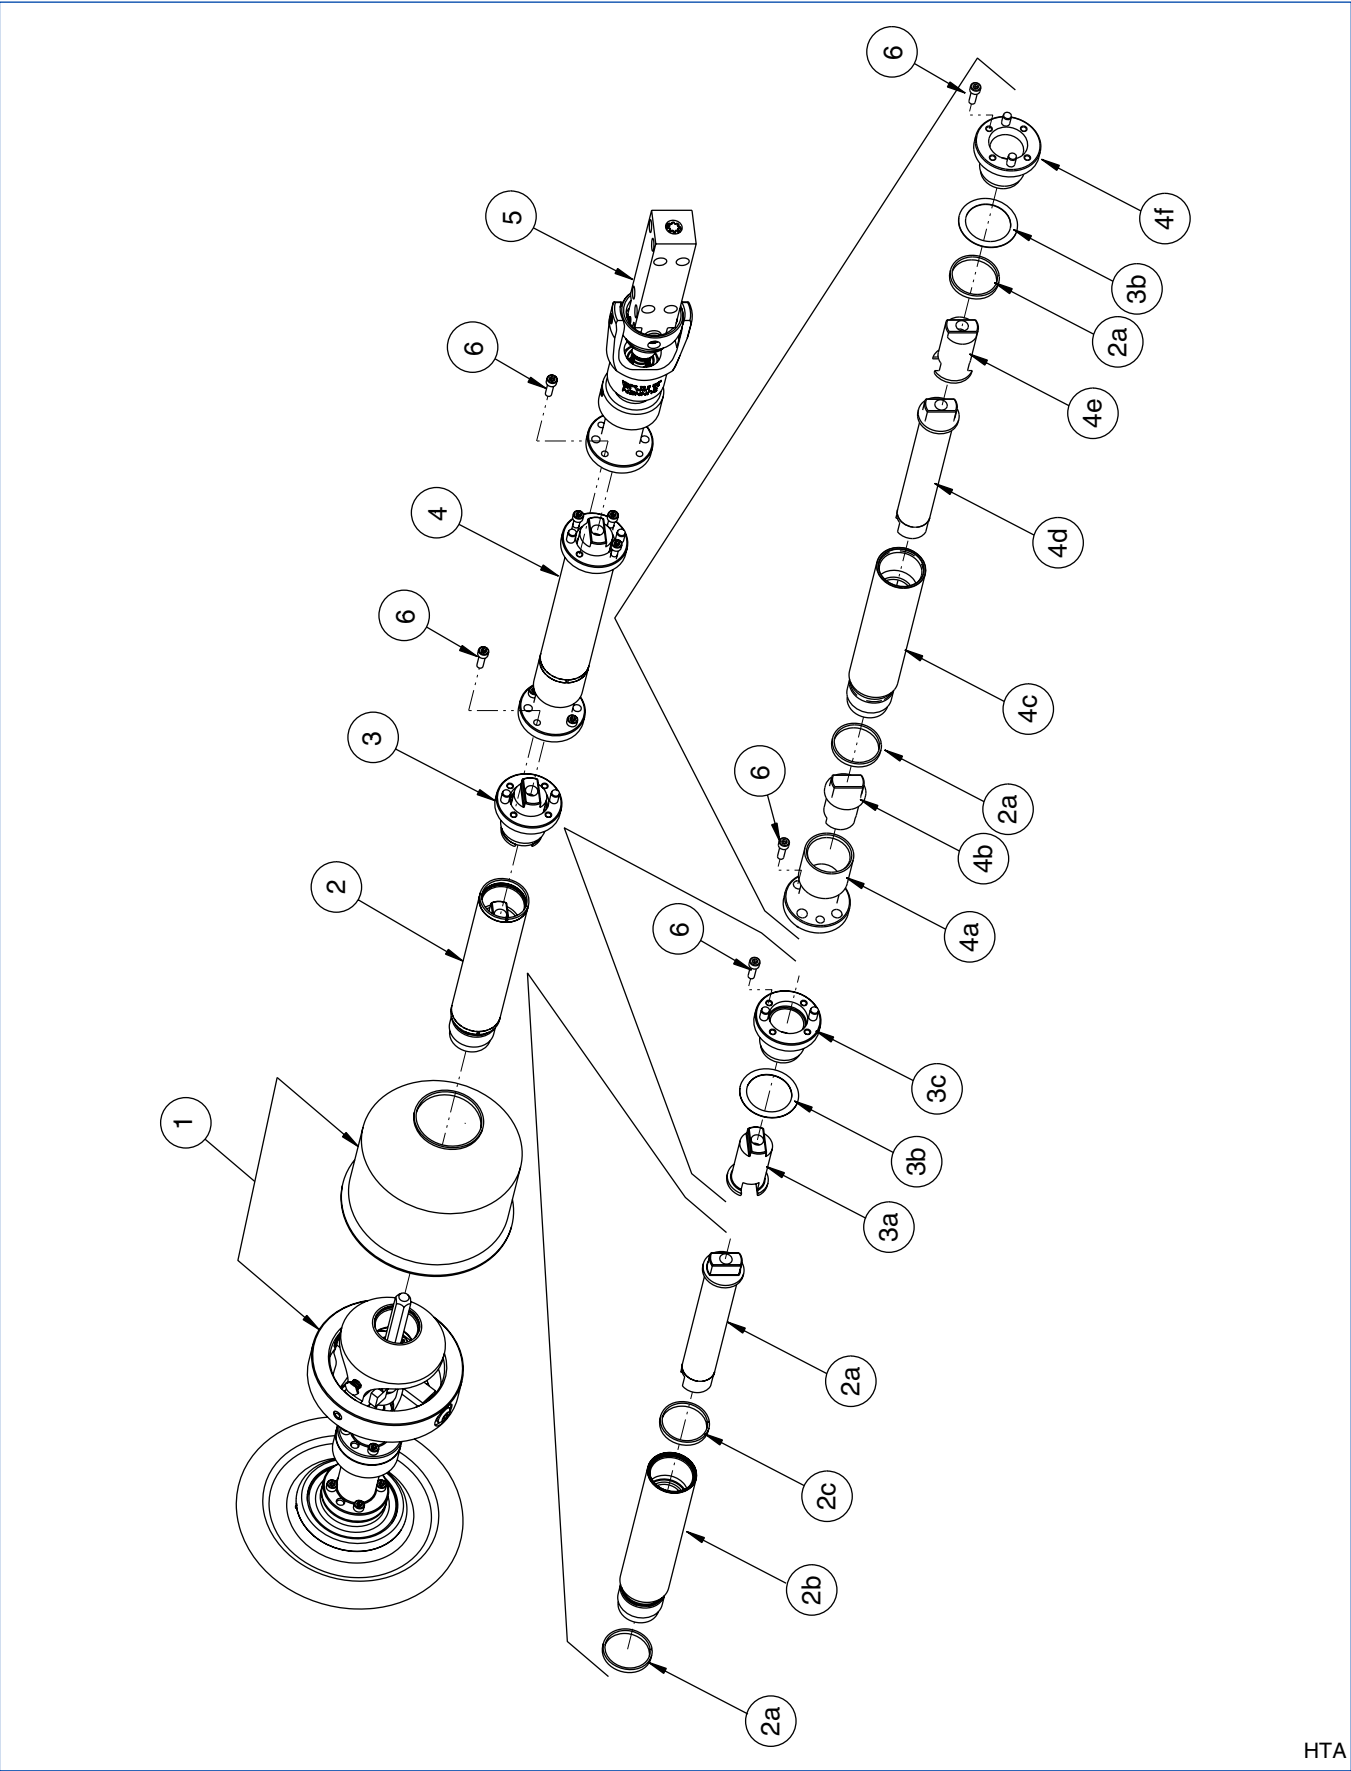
B – ANR HONE HEAD UNIT w/HTA-ANR DRIVESHAFTS
